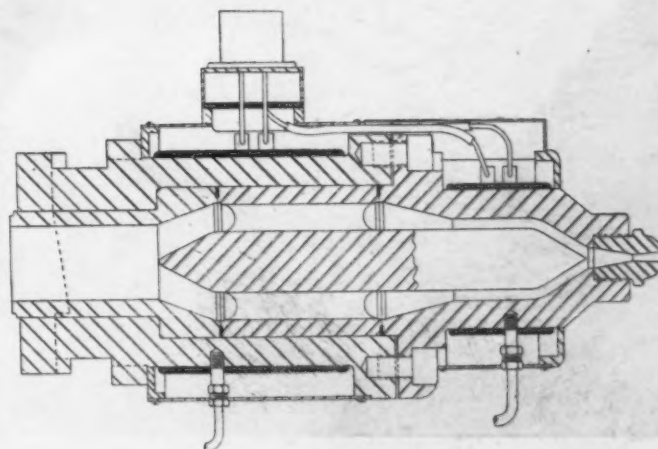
A sectional drawing illustrating the new H-P-M material heating chamber used to plasticize the molding material prior to injection into the sealed mold.
